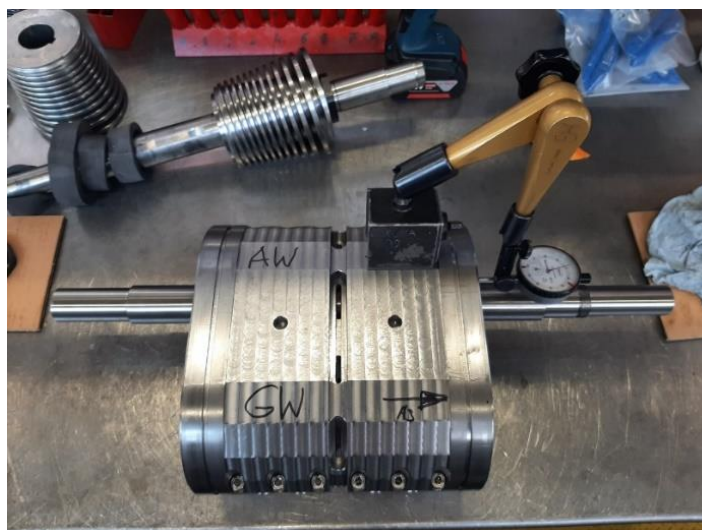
Finding the axial position of the shaft inside the housing insert to set the gaps housing insert to the outer diameter of the spindles.
